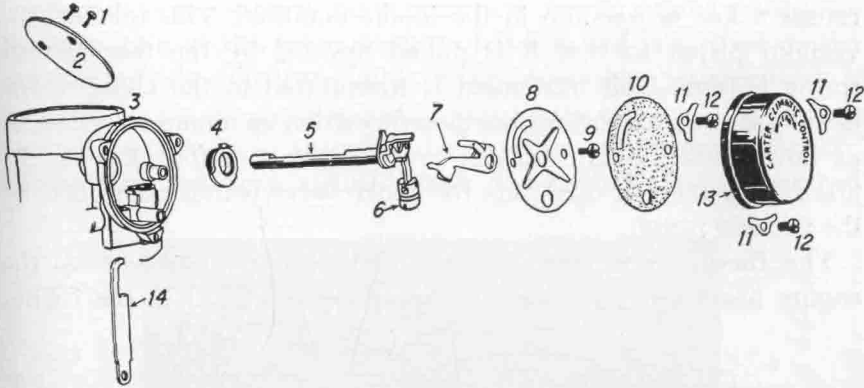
Disassembled view of an automatic choke. Thermostatic spring is in the housing to right. (Studebaker-Packard Corporation)
